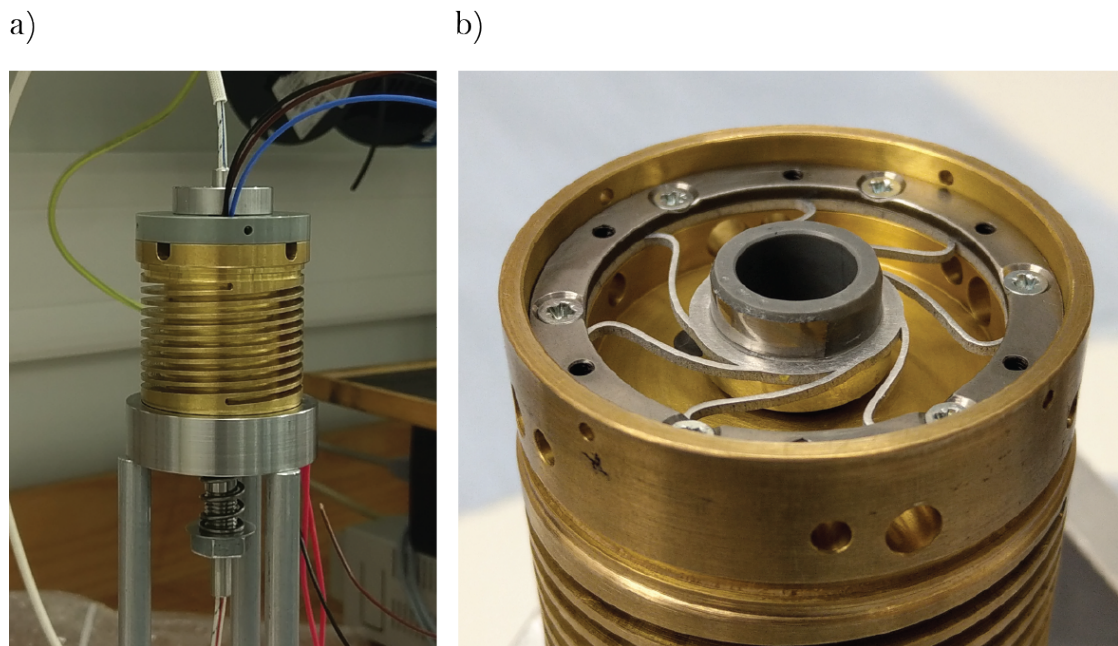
a) Alignment station to glue and align bushings to flexible support; b) Aligned and glued bearing bushing supported on flexible membrane and fitted to electric stator
